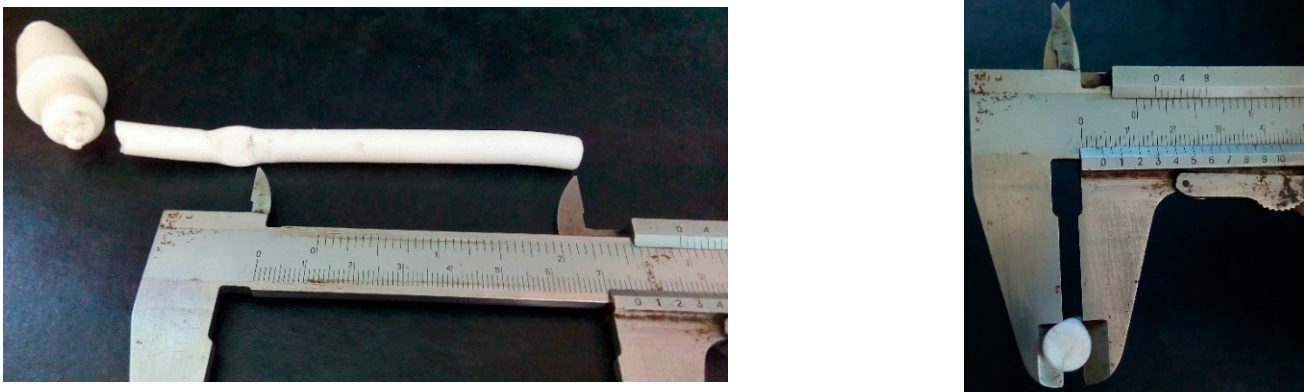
Cracked specimen for fretting ring distance above 70 mm (left), and deformed diameter (right).
